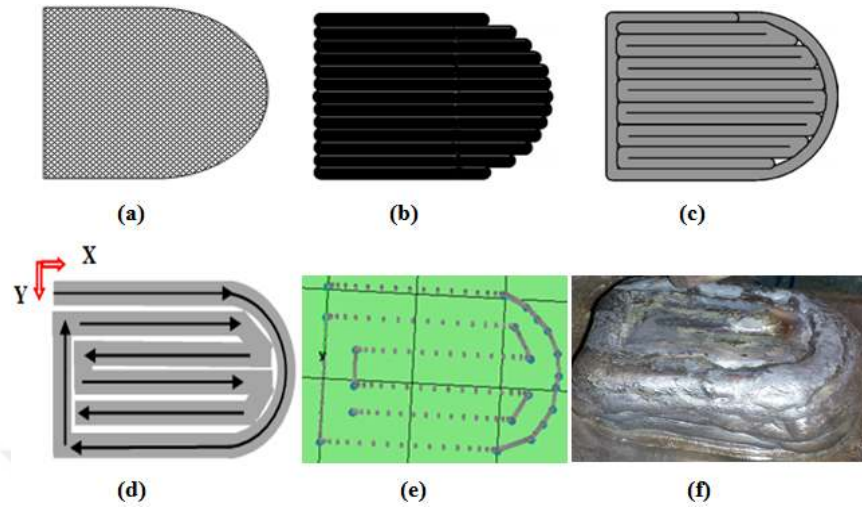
21. (a) A solid filling part; (b) raster file for DMD; (c) contour and raster fill for MIG- SMD; (d) combined paths fill for TW-SMD; (e) CAD drawing; and (f) real deposited part using TW-SMD method.
